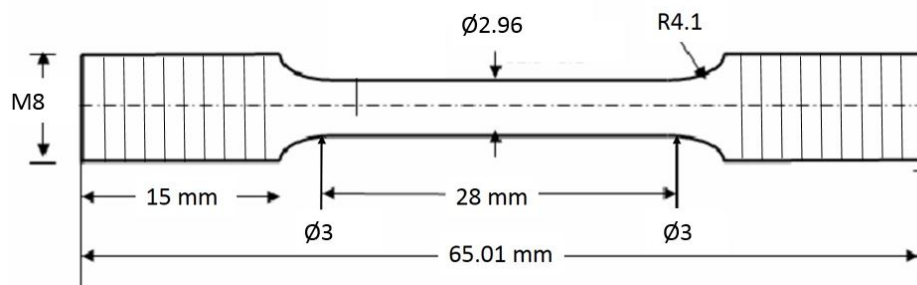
The dimensions of tension rod after precision machining given in millimeters.
